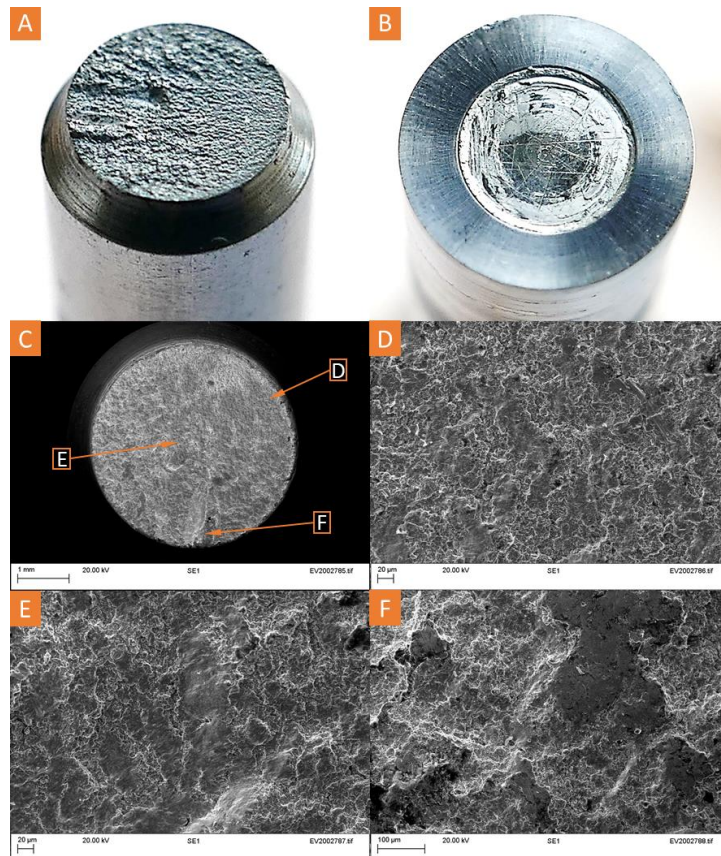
Fracture surface of the components from Tool 2 after 92 welds:
